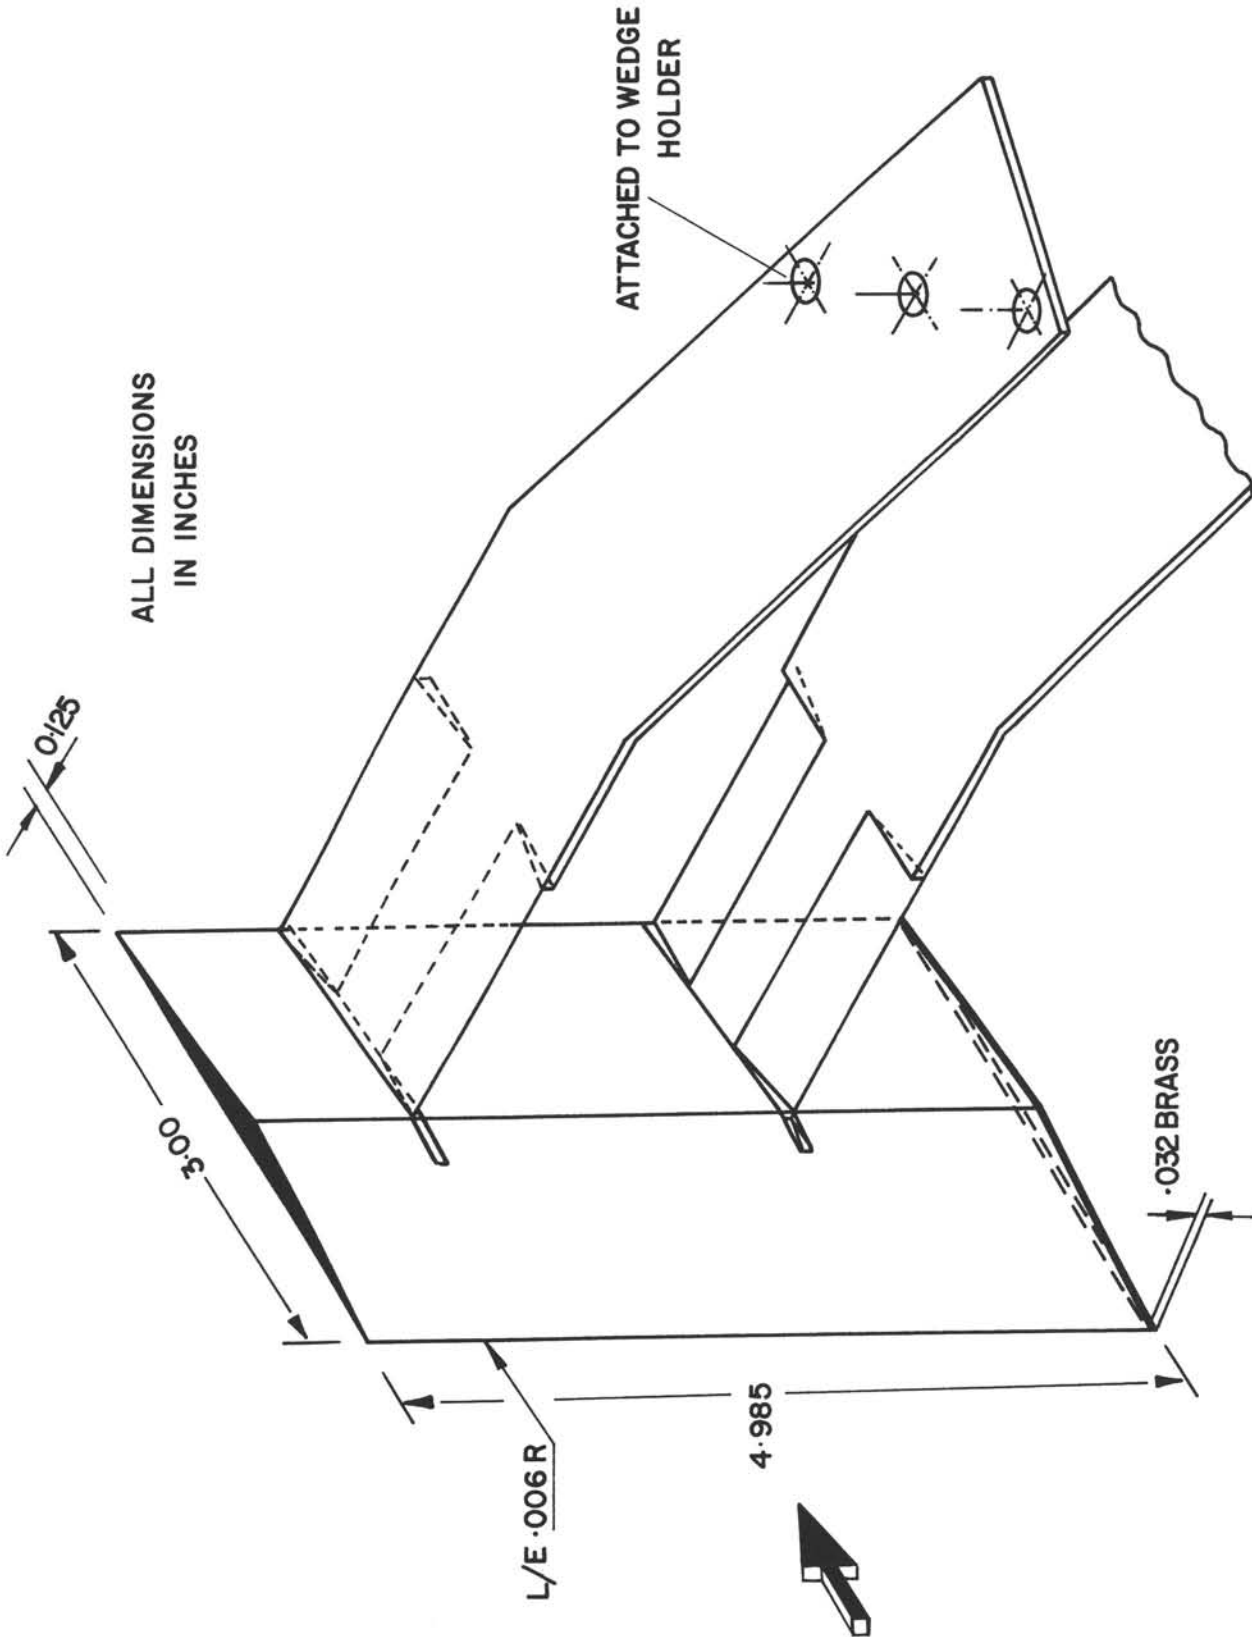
ISOMETRIC VIEW OF WEDGE ASSEMBLY
